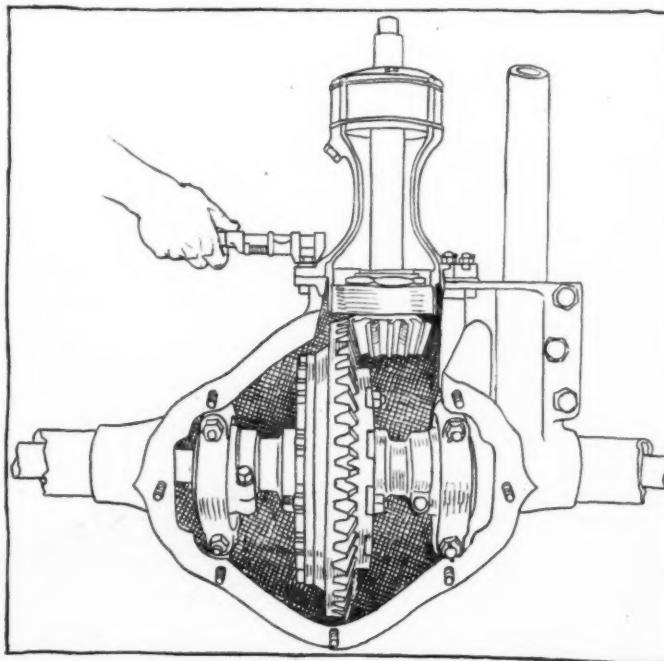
Showing bolts which have to be removed in adjusting gear mesh
